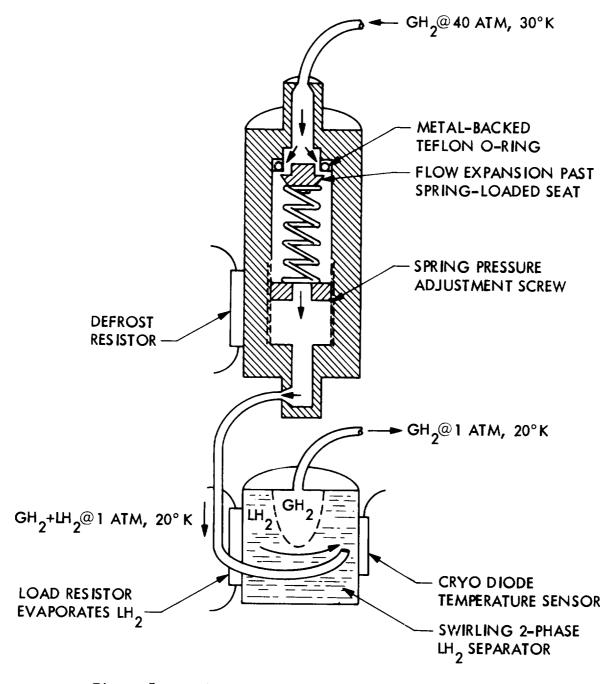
Joule Thompson Valve and Cryostat Assembly.
